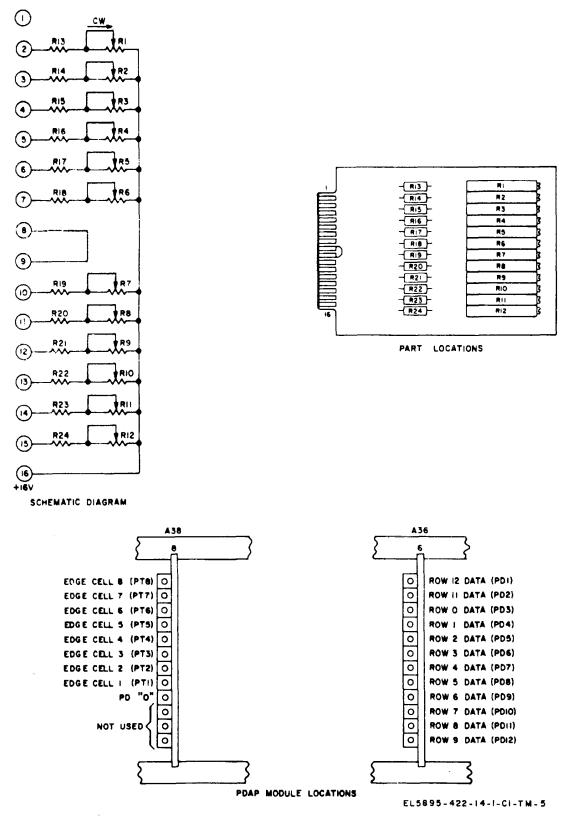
Photodiode adjustment potentiometer (PDAP) printed wiring board assembly
